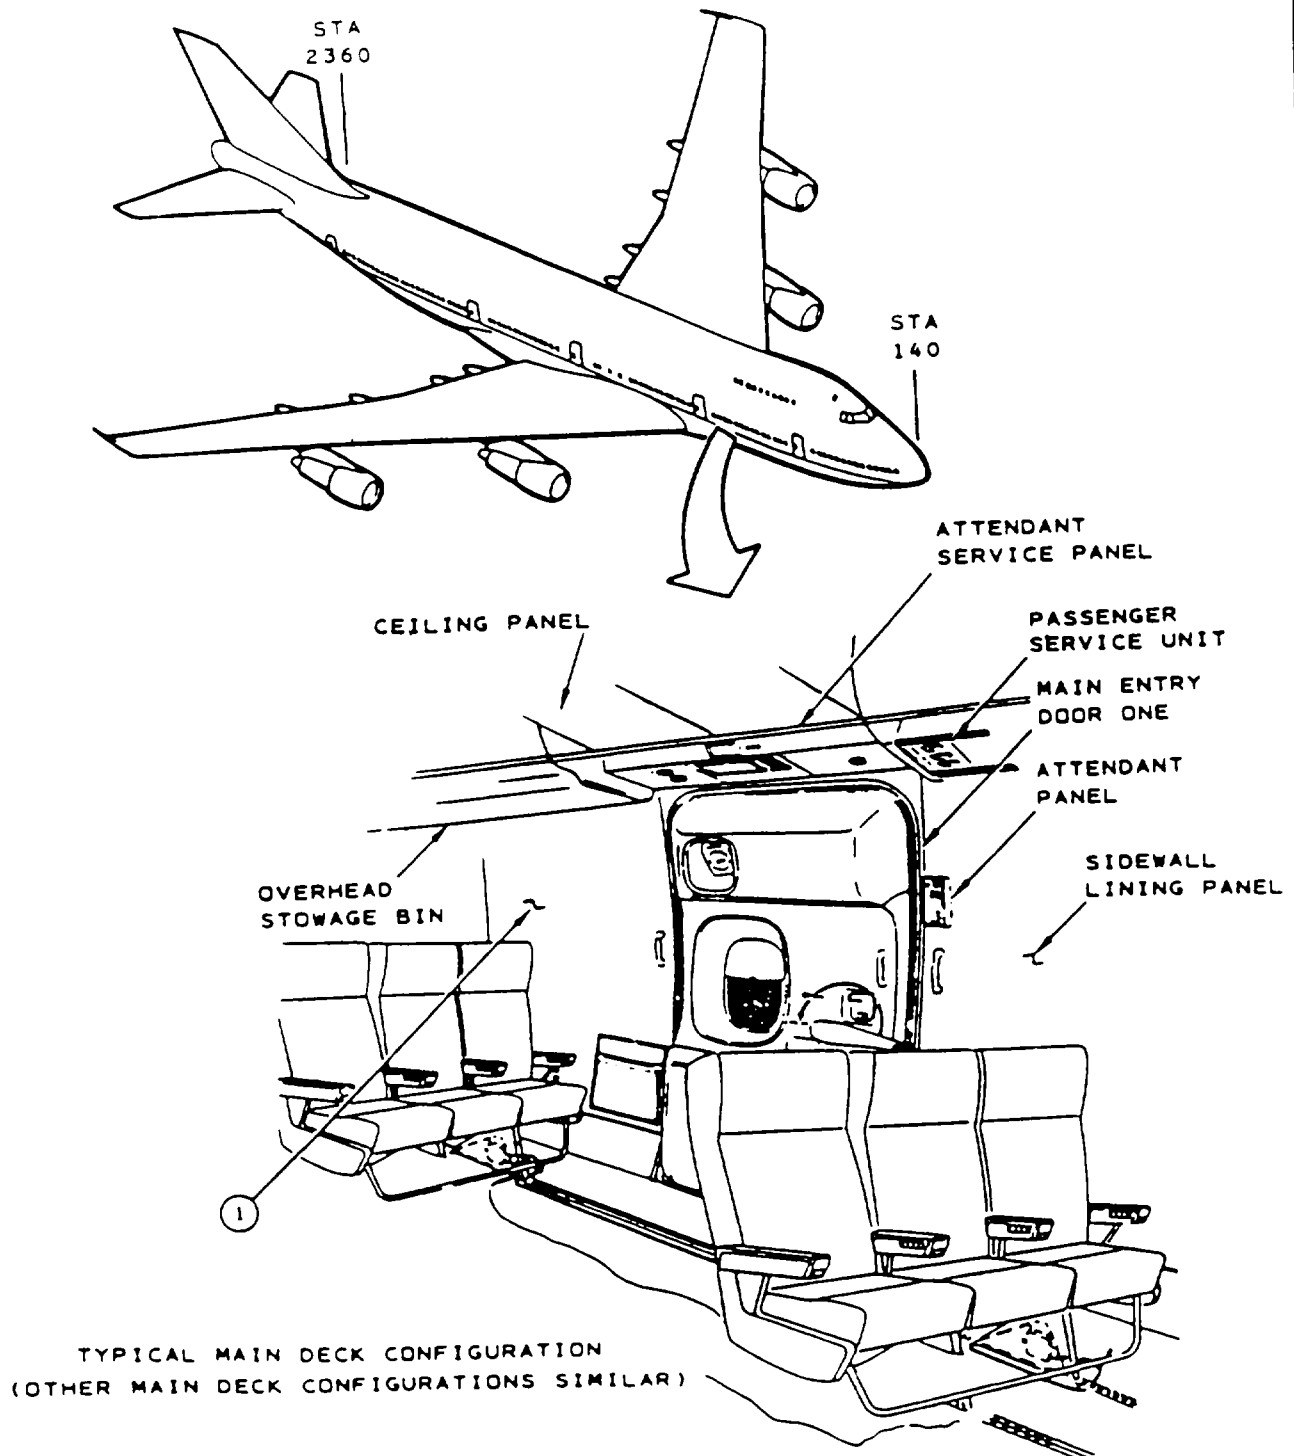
MAIN DECK LAP JOINT INTERNAL ACCESS
